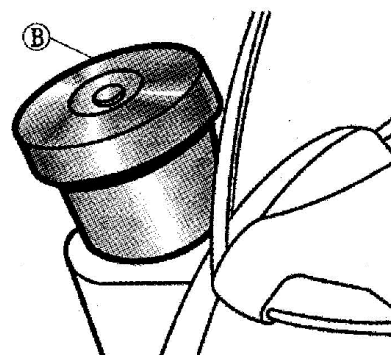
11 Oil - filler cap of timing gear chamber
